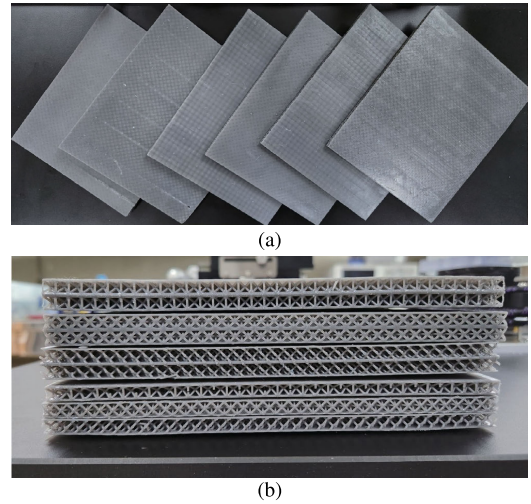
Sample fabricated using a 3-D printer (a) sandwich samples (b) cross section view of sandwich samples.
